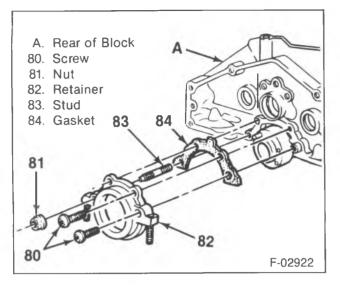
Rear Crankshaft Oil Seal Retainer Installation
